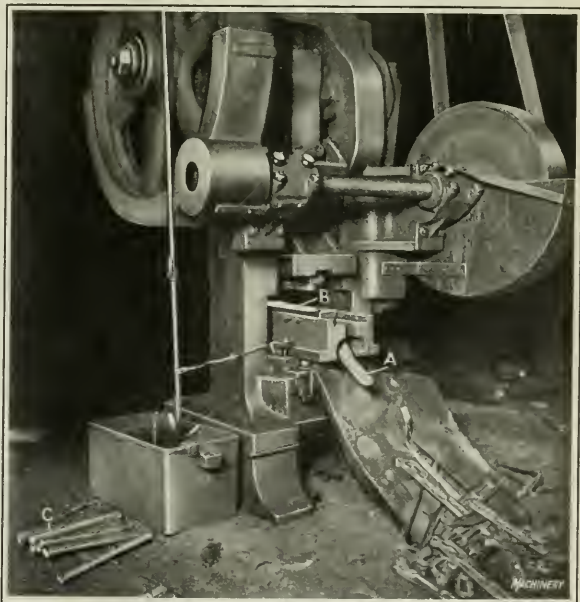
Geared Press engaged in a Hot-trimming Operation
